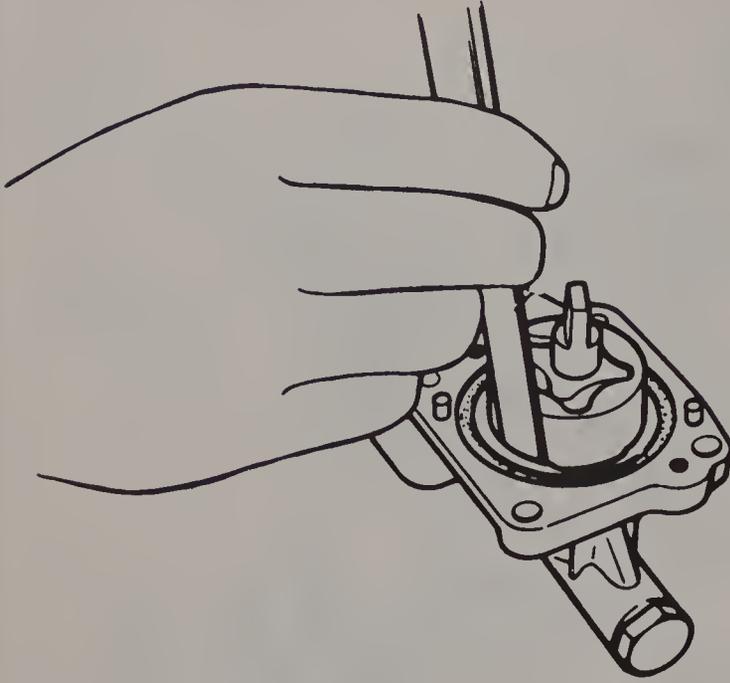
Checking rotor-to-case radial clearance (Sec 9)
